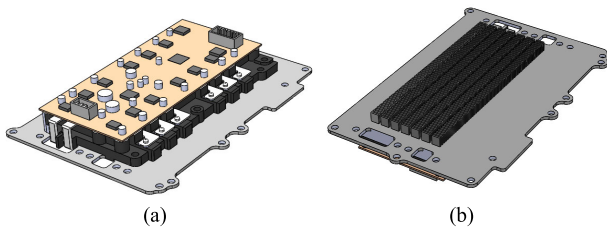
IPM from Fuji Electric/Honda Accord Hybrid: (a) Top view. (b) Bottom view with integrate straight pins [78], [79].
